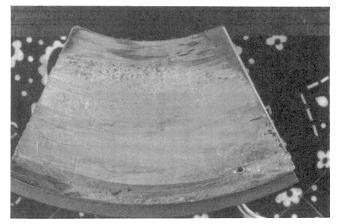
Pad Failures Due to Overload on a 15,000 HP Steam Turbine.
